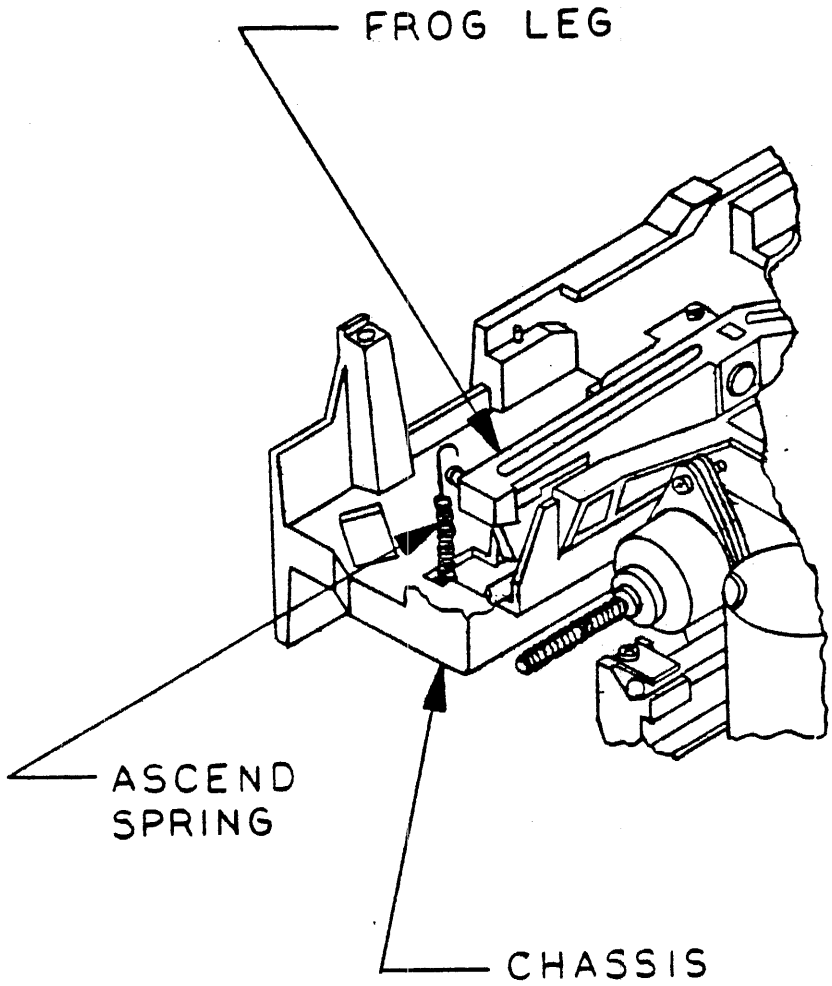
THE INSTALLATION OF THE ASCEND SPRING
